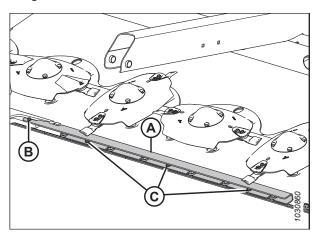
Left Deflector Plate Installed on Aft Edge of Cutterbar – View from Rear
